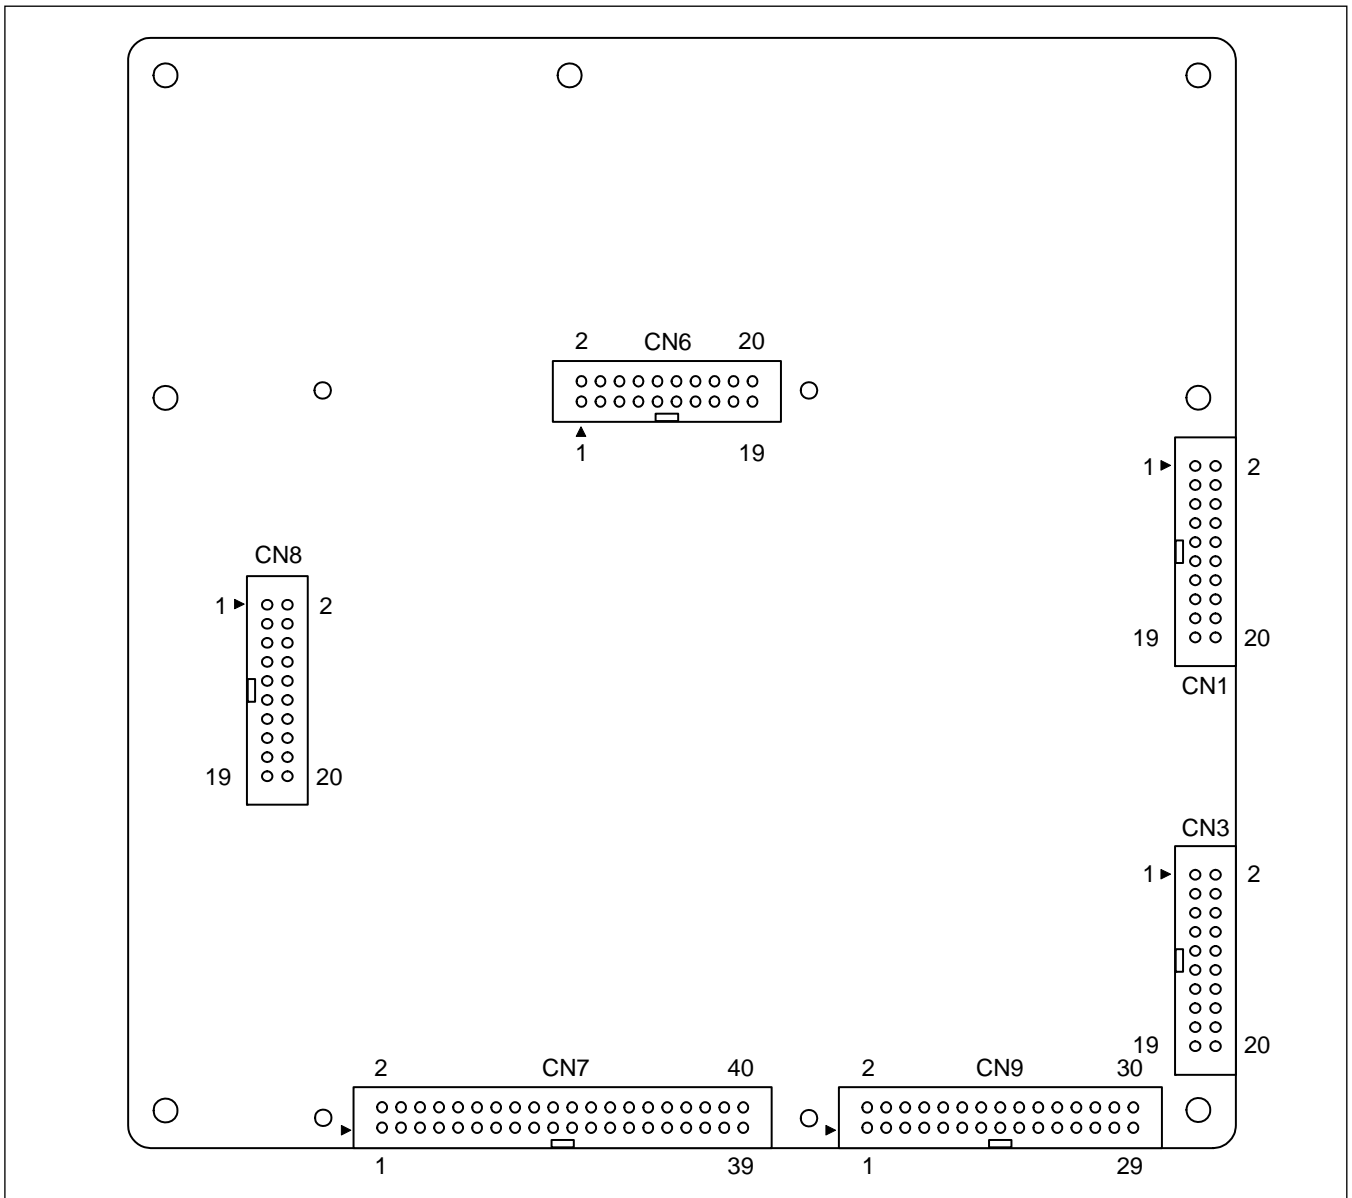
Expansion Connector Pin Assignments (Top view of the solder side)
